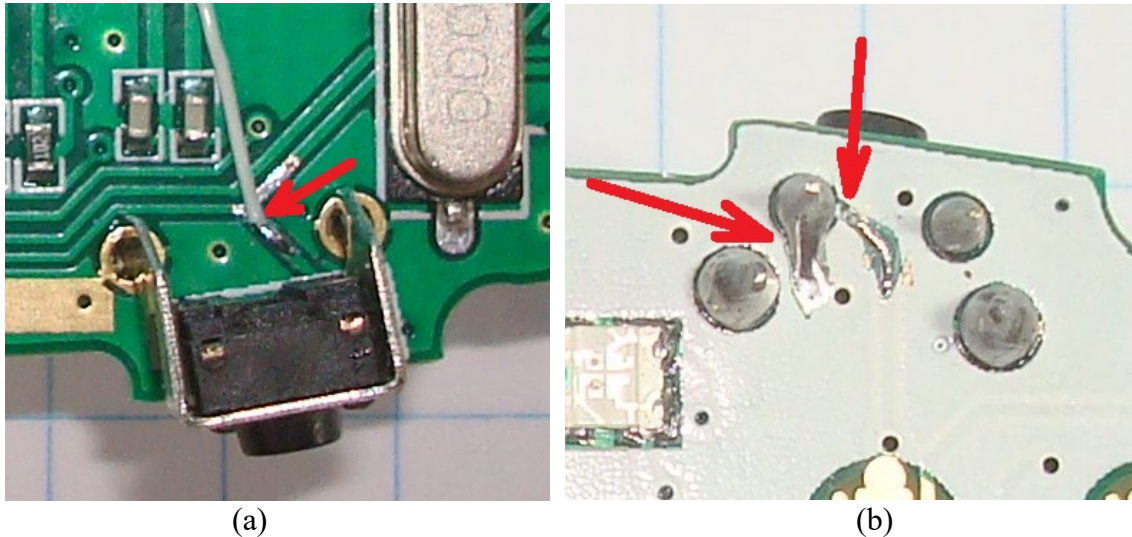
PTT switch detail. (a) shows the top side trace cut (the trace is cut under the wire where the arrow points). (b) shows the bottom trace cut & GND solder bridge.
